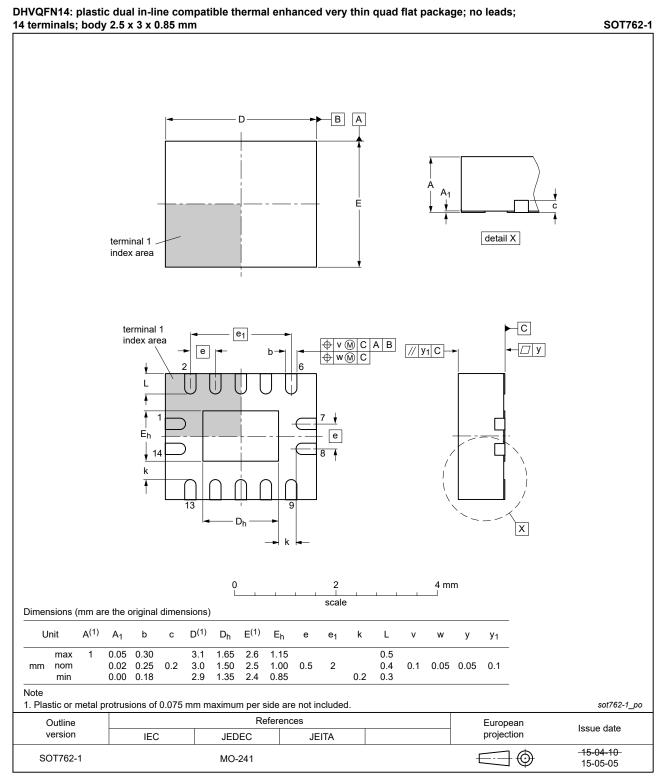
Package outline SOT762-1 (DHVQFN14)
